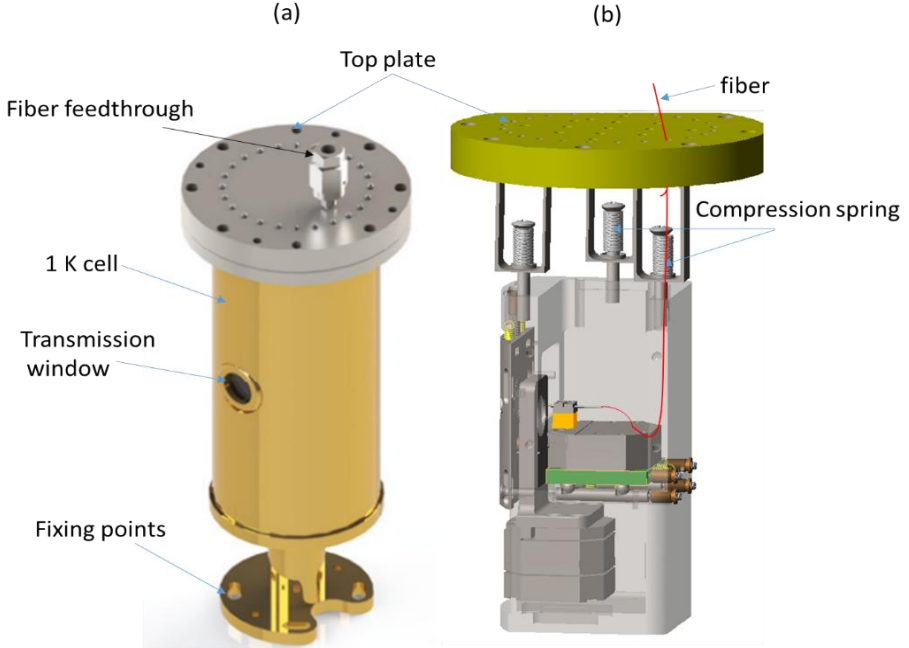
(a) The inner gas cell with the top flange on which the cavity assembly is mounted. (b) Finished cavity assembly hanging from the top plate of the inner 1K cell of the cryostat, where one side has been rendered to be transparent.
